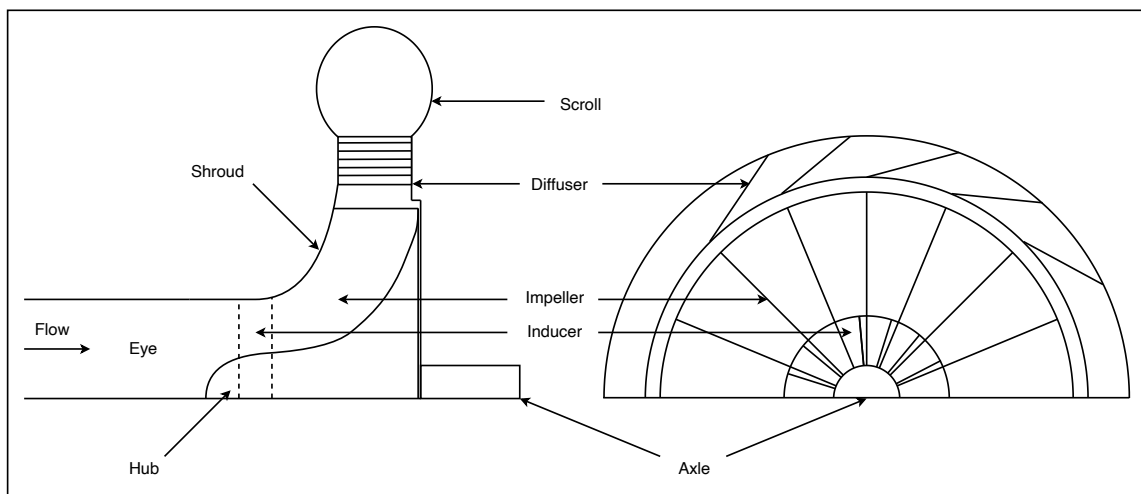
View of the main parts of a compressor seen from a cross-sectional and axial view.
